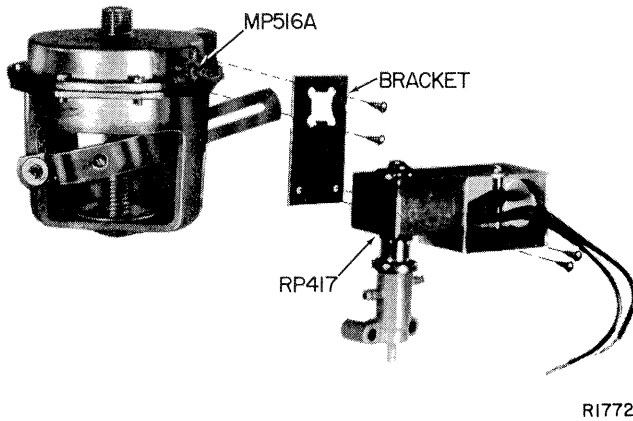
RP417C Relays Mount Directly to an MP516A Operator Using the Mounting Bracket Contained in Adapter Kit No. 14003638-001.
